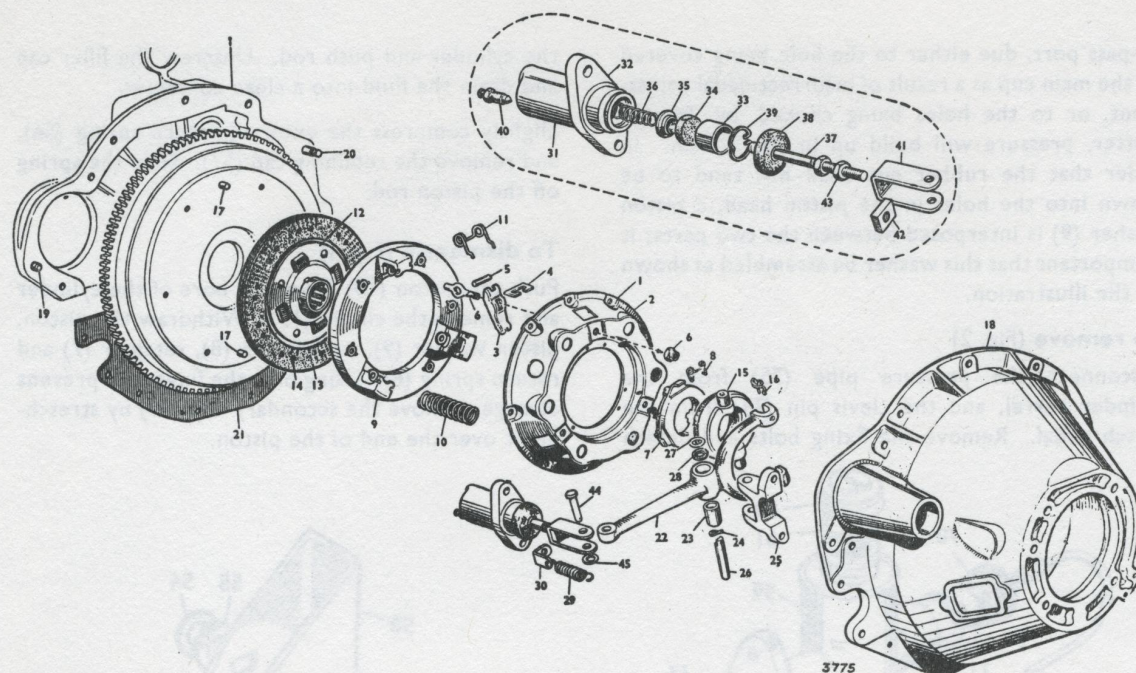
Exploded view—Clutch components and slave cylinder (Alpine Series I, II and Rapier Series IIIA cars)
